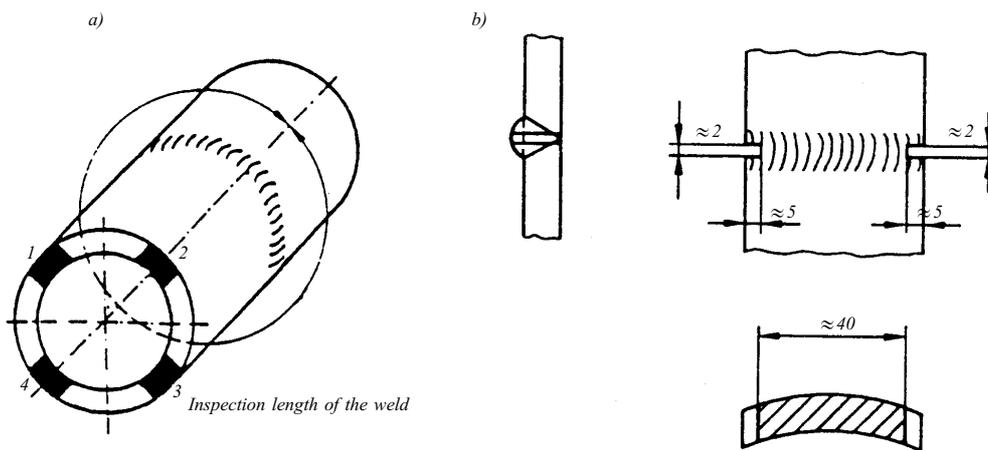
Diagram of cutting-out (a) and test specimens from the test pieces P₃, P₅ and P₆ of butt pipe joints (b) for weld metal fracture testing; 1, 2, 3 and 4 = places for the selection of static bend test specimens from the test pieces prepared using slag-free methods of welding.
